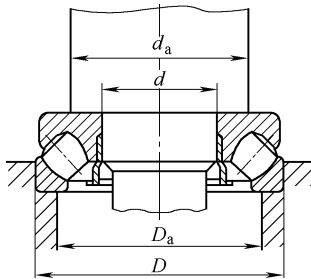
Thrust self-aligning roller bearing installation dimension
